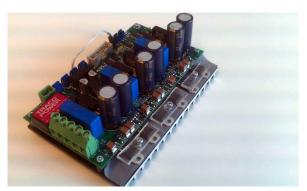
Final inverter circuit board mounted to heat sink
